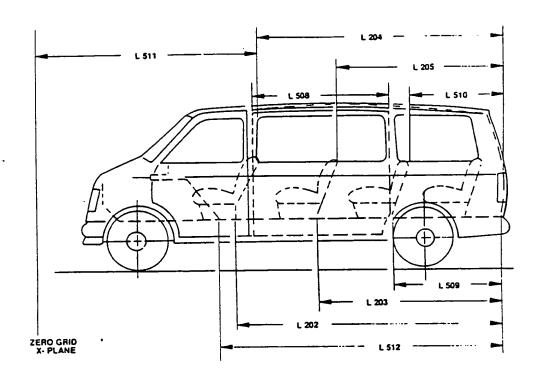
TRUCK CARGO SPACE DIMENSIONS, LENGTH (CONTINUED)
